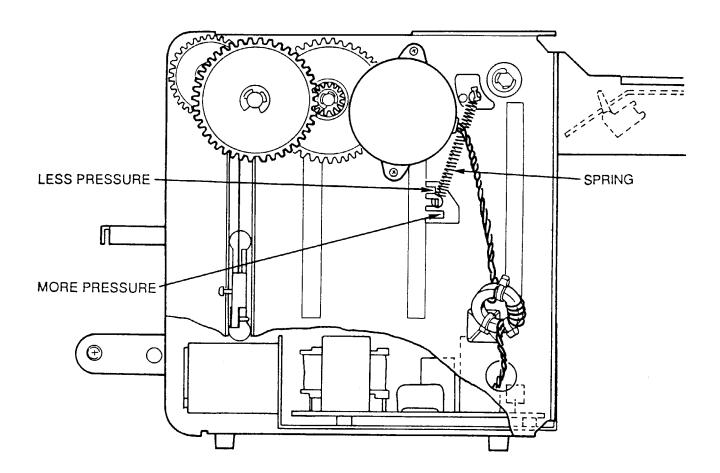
DRIVE ROLLER SHAFT SPRING ADJUSTMENT
